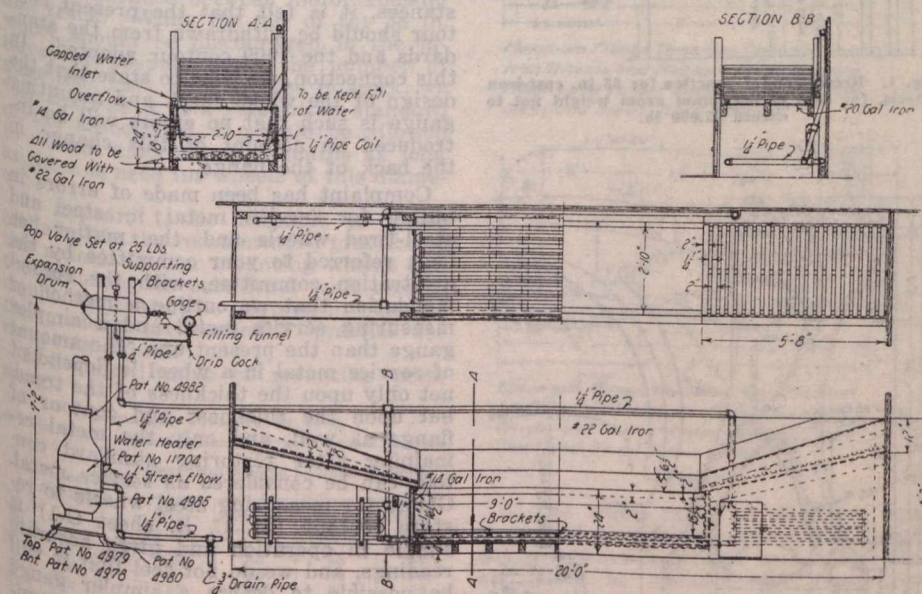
Waste Reclaiming Plant, using stove to heat water.
